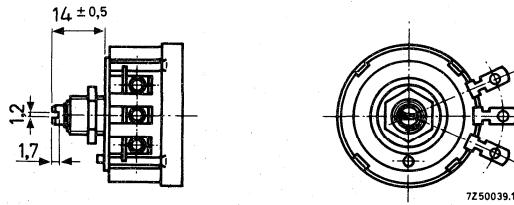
Potentiometer with spindle with screwdriver slot. Dimensions are identical to those in Fig. 1 except as shown.
